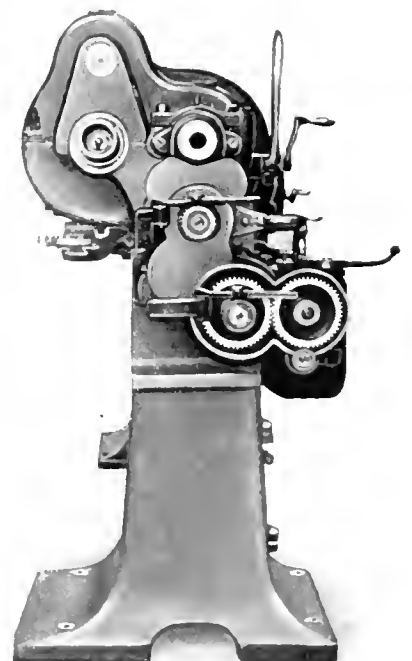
End View of Lathe showing Feed Gearing Connections.
